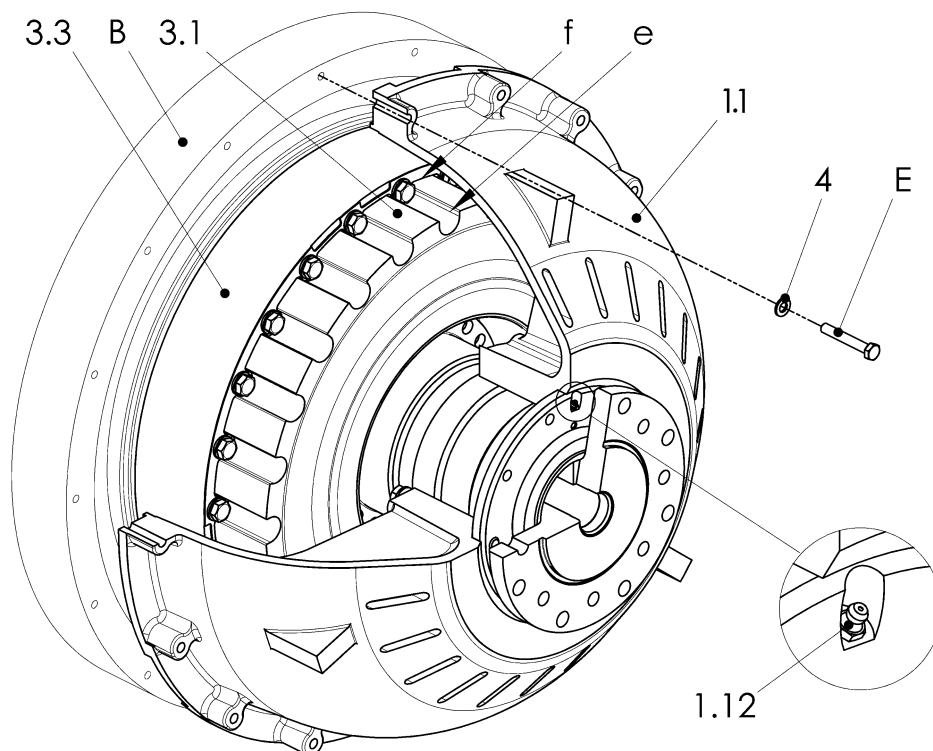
Mounting the flange bearing housing assembly to the flywheel housing
